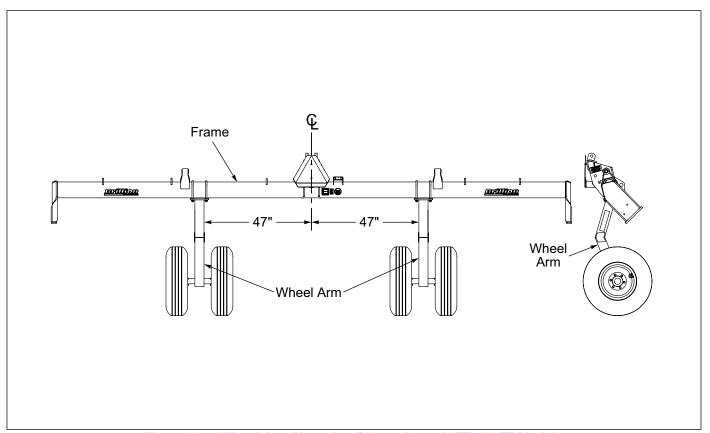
Wheel Arm Mounting Dimensions, 18FT - 20FT Models
